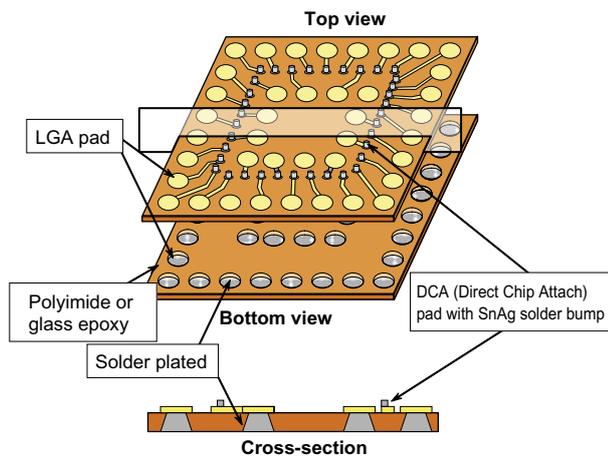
Illustrative drawing of interposer shown in Figure 1.
